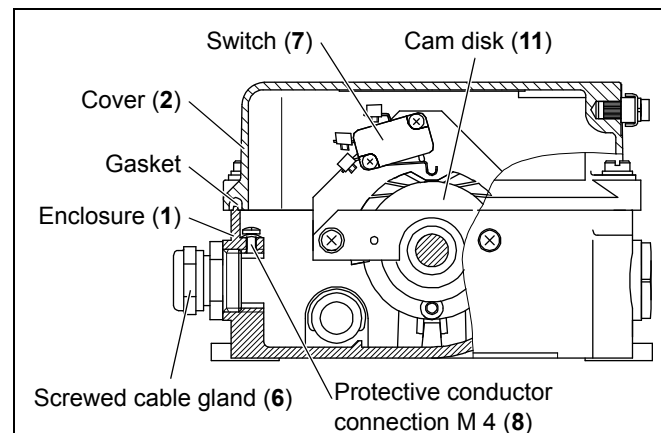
Dismounting the belt misalignment switch from the conveyor
